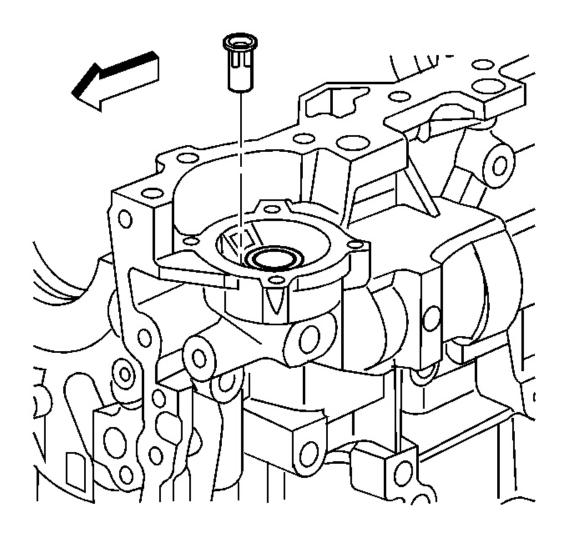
View Of Oil Filter Bypass Valve Courtesy of GENERAL MOTORS CORP.
